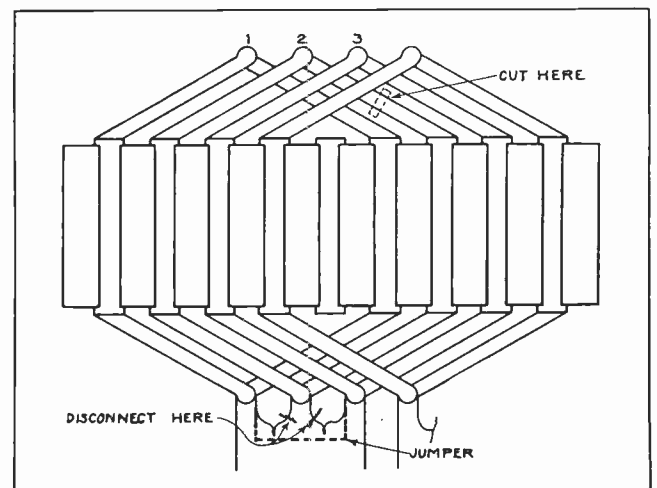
This diagram illustrates the method of cutting out a defective coil with a jumper. In this manner a machine can be quickly repaired and kept in service until such time as the defective coil can be replaced.
